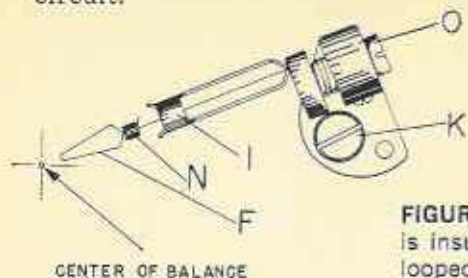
Contact spring assembly is insulated from the movement. Point looped front spring directly to center of balance. Do not dismantle unit.
